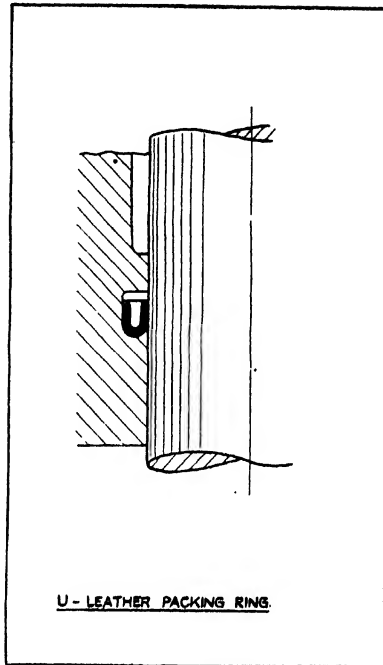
SELF-ADJUSTING TYPE OF LEATHER PACKING RING
